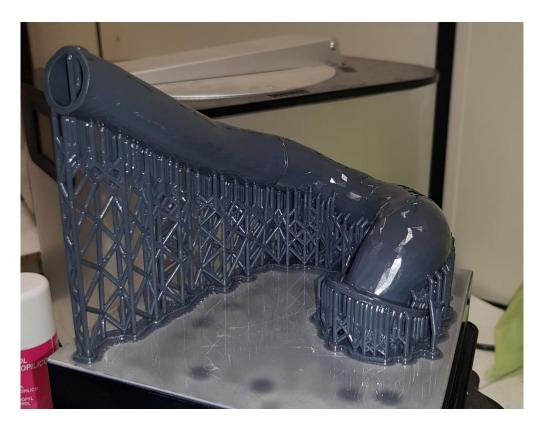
3D printed aorta with the supports due to the Formlab 3D printer.
